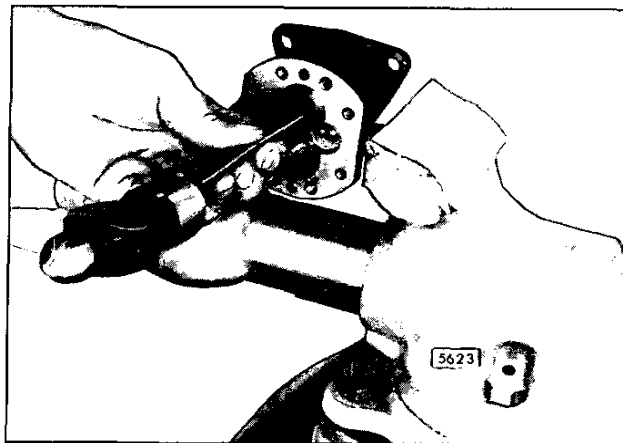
Removing Oil Seals Using Tool J 1508-13
